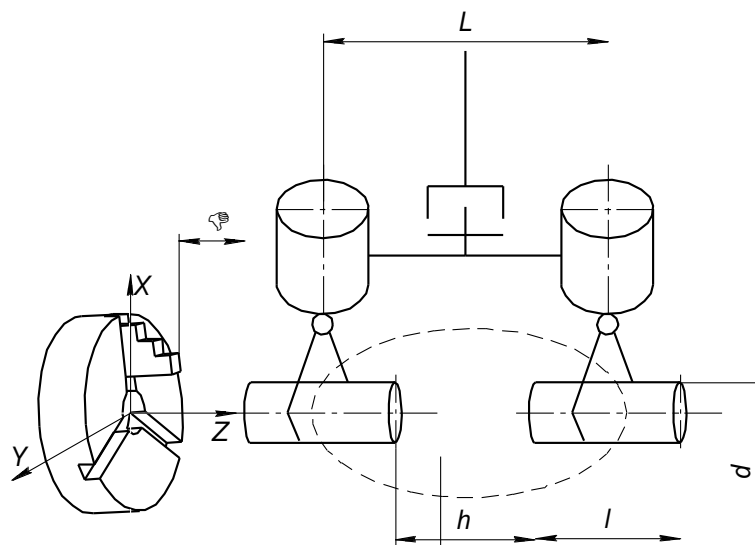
Calculation scheme for determining the required space in the working area of the machine tool
